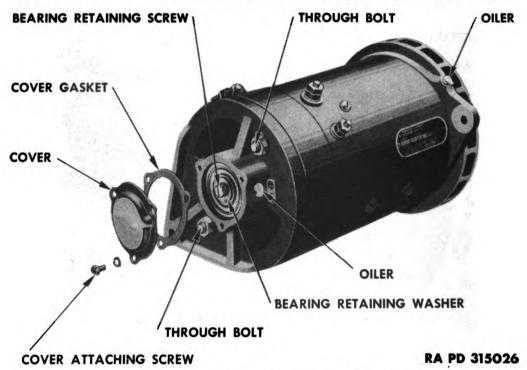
Commutator End Construction of Group 2 Generators with Ball Bearing at Commutator End
